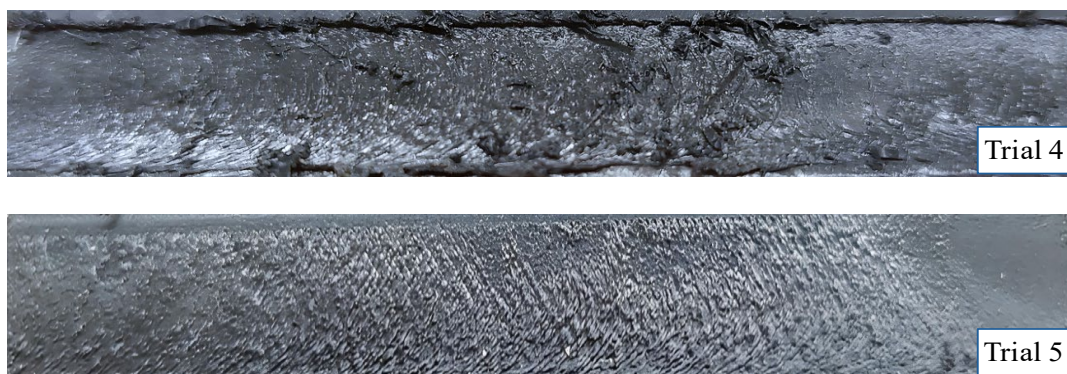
Comparison of milled surfaces from trials 4-5 (6 mm tool radius)
